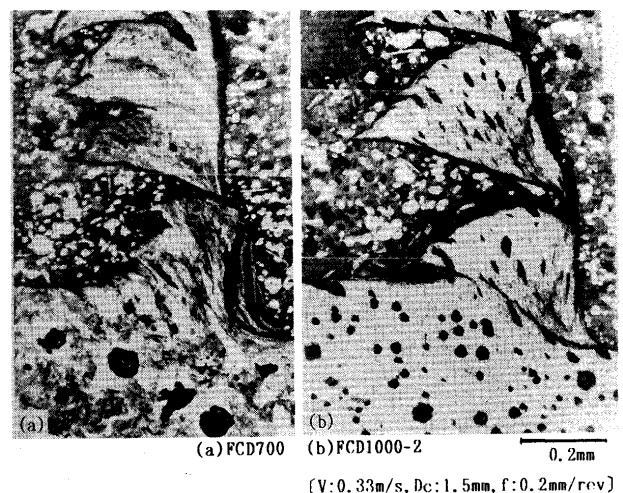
Chip forming state in machining of FCD700 and FCD1000-2, Sample was extracted by quick stop device.
